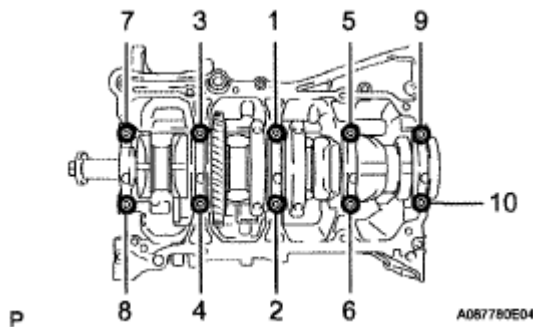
Identifying Bearing Cap Bolts In Sequence
